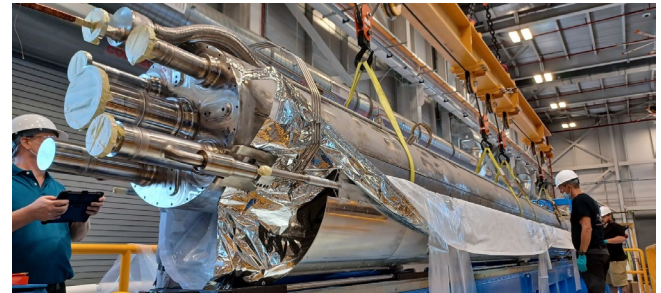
The Cold Mass being lowered into the thermal shield lower shell assembly.
